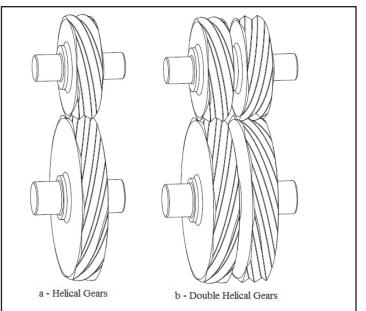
Self-locking gear design; a – helical gears; b – double helical gears.
